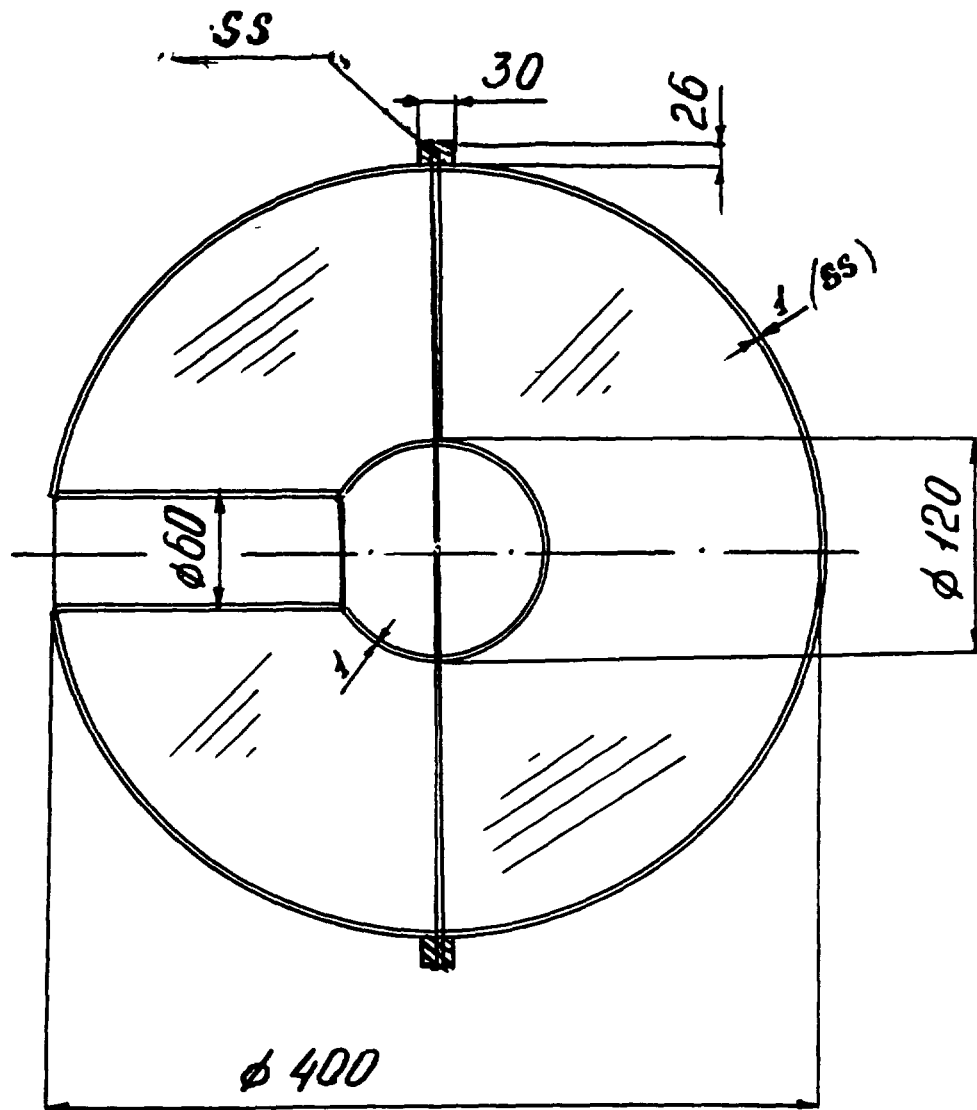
Geometry of PbLi assembly (sizes are given in millimeters). Shell was covered outside and inside by 1mm thick stainless steel and had a steel ring to mount it.
